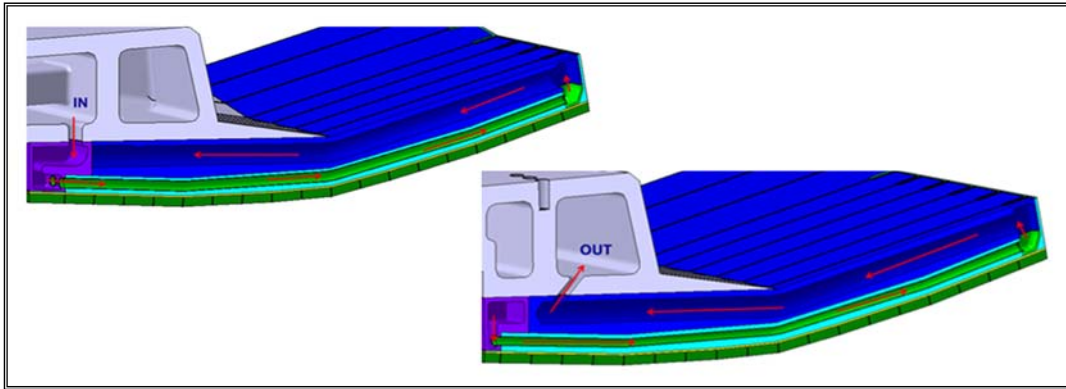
Detail of the NHF blanket module FW cooling circuit.
